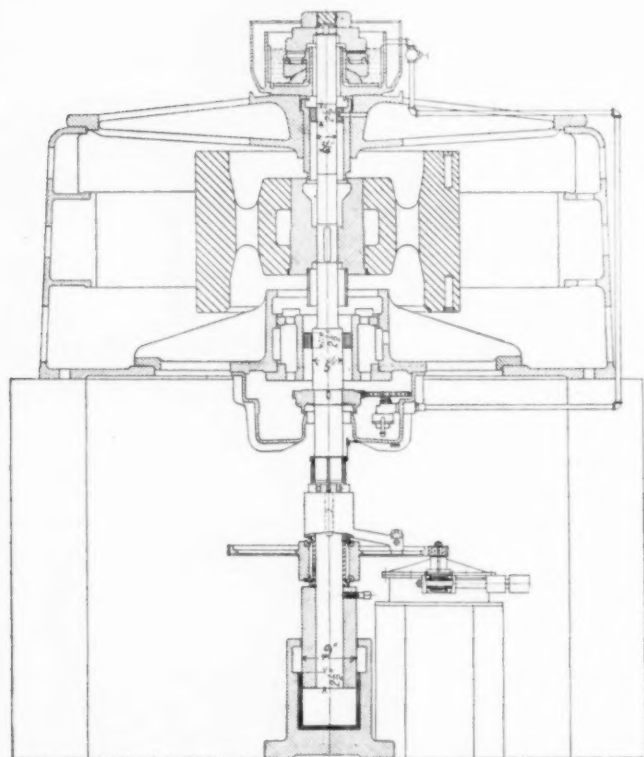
VERTICAL SECTION OF THRUST-BEARING TESTING MACHINE SHOWN IN FIG. 1
